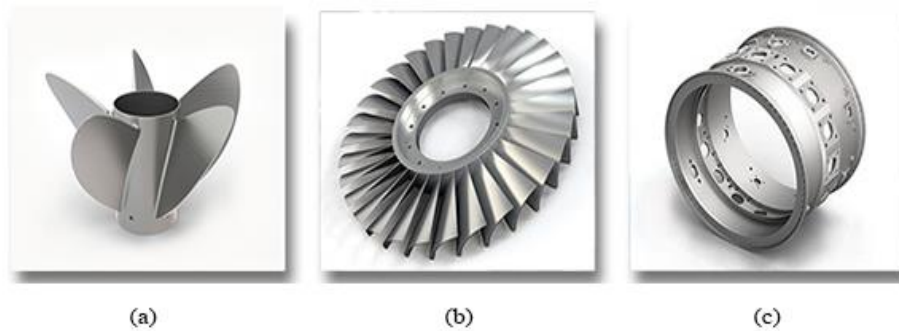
Various Materials manufactured using FGMs (a) Impeller (b) Turbine Blades (c) Cam Ring
